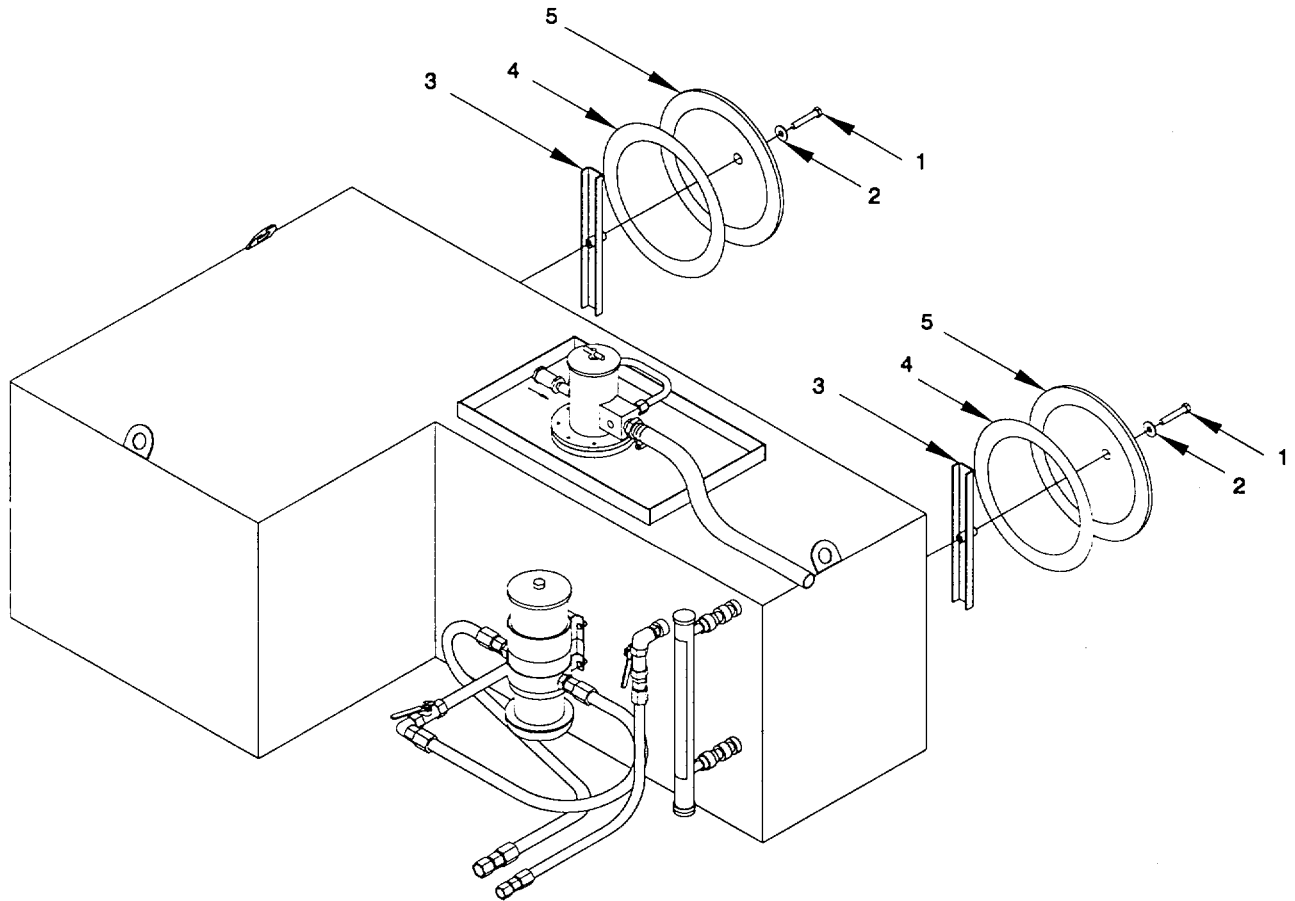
Inspection Covers, Fuel System, Remove/install.
